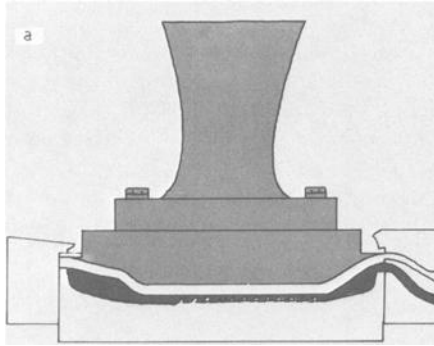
Dummy last lowered into mold assembly over the soleplate, allowing outsole portion to be injected. This is the first step of a two-step direct attach operation.
